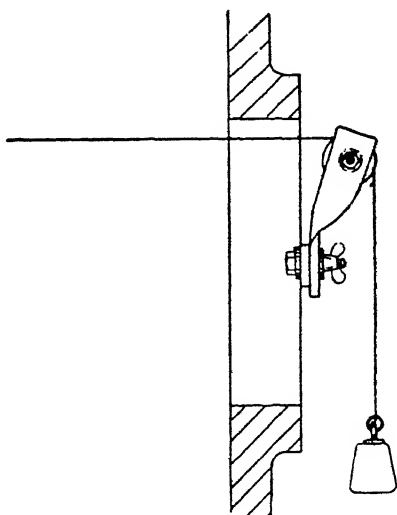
FRONT SECTION OF BEDPLATE IN ELEVATION, SHOWING WIRE TENSIONING ATTACHMENT
